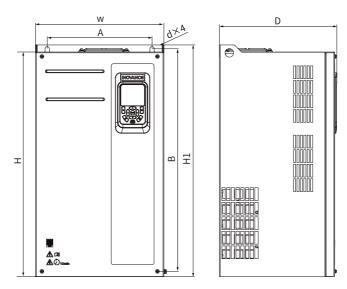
Outline dimensions and mounting dimensions of T7 to T9 models
